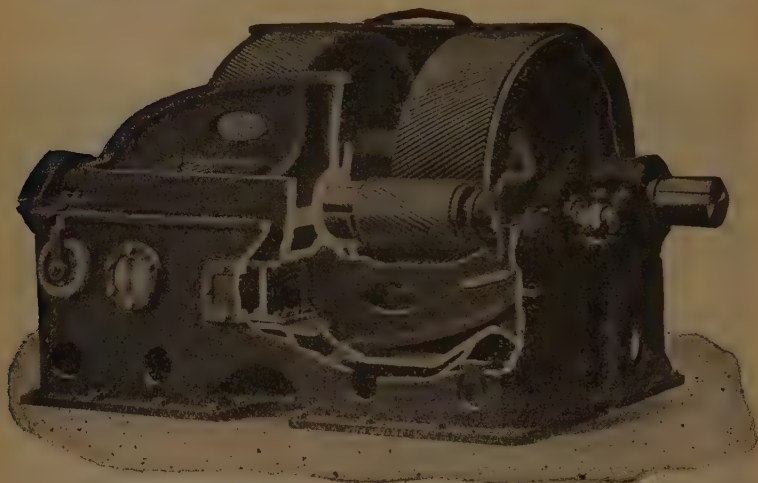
,760.—View of 6,000 horse power Melville-MacAlpine speed reduction gear with case broken away showing construction. It is a double helical spur gear, designed with involute teeth, and a transmission capacity of 6,000 horse power at a pinion speed of 1,500 *r.p.m.* The pinions have 35 teeth, the spur wheels 176 teeth. The 176th tooth constitutes a bunting cog and equalizes the wear. The pitch circle diameters are 14 ins. and 70 ins. respectively. The reduction ratio is thus practically 5 to 1, hence the power is delivered from the gear at a speed of only 300 *r.p.m.* The pitch line speed is 5,500 ft. per minute and the design is based on a limiting pressure of 450 lbs. per inch of tooth contact. Provision is made for the liberal use of lubricating and machine oil. Rear-Admiral Melville writing in *Proc. Inst. Civil Engineer*, Feb., 1910, states as follows: A full power test of 6,500 horse power was carried out for a period of 40 hours from 2.30 P.M. on Oct. 16, 1909, till 6.30 A.M. Oct. 18. At the close of this test the gear was found to be in excellent condition and without any sign of wear. This established without question the fact that gearing could be made to transmit such large powers continuously at high speed.
